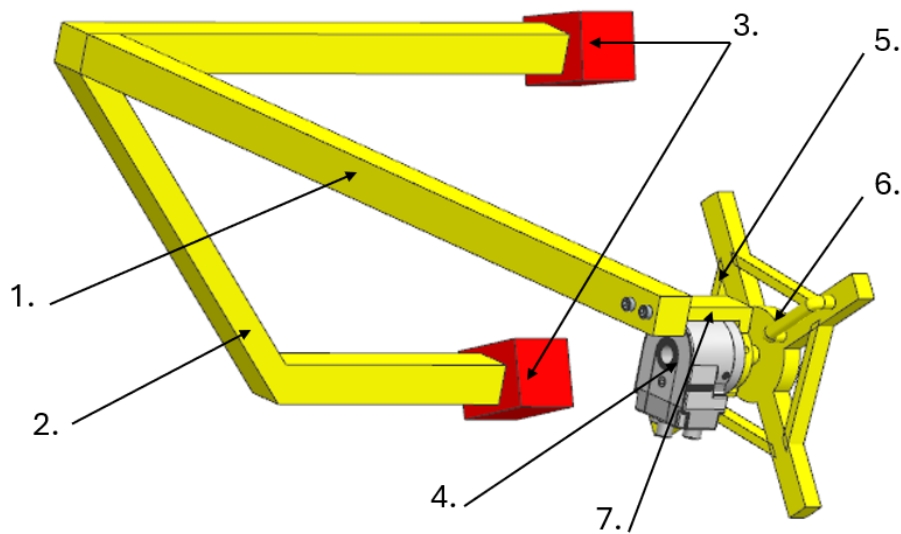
Concept of crankshaft measuring tool from NX with parts numbered.
